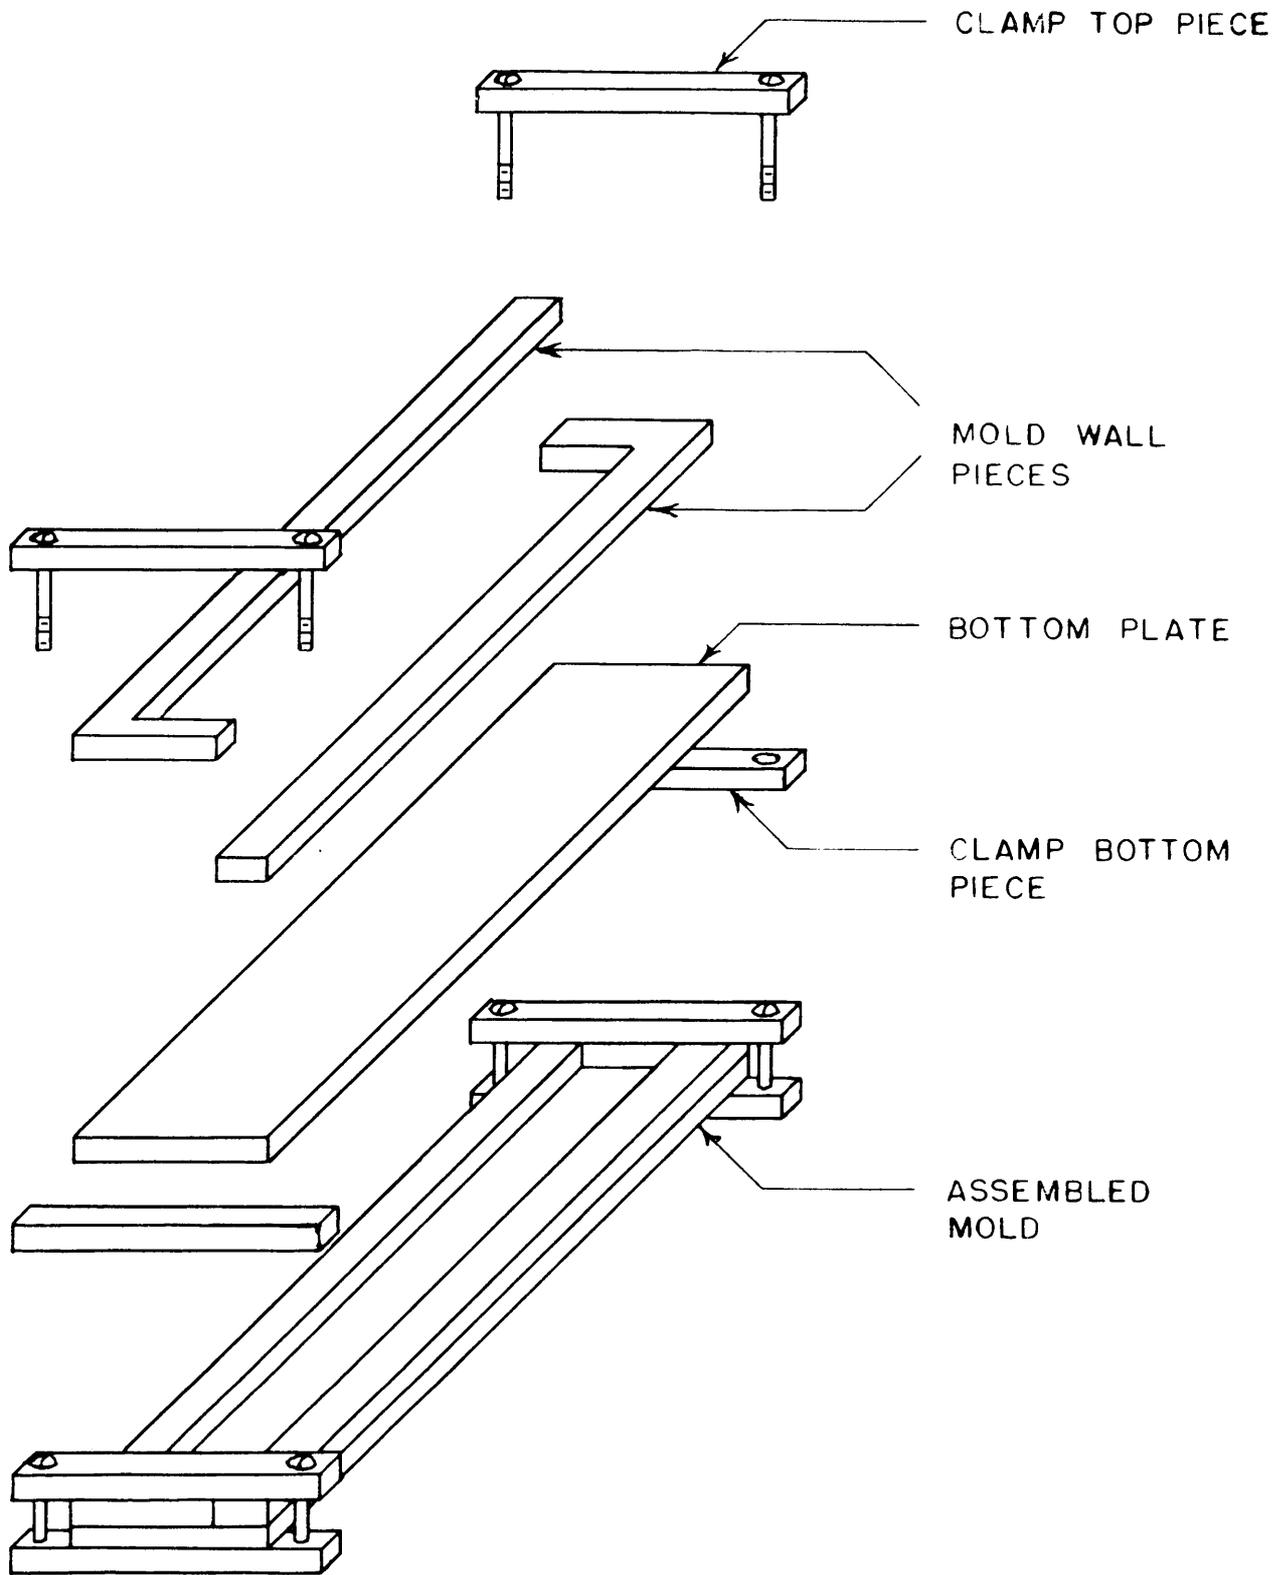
FIGURE I. FLEXURAL TEST BAR MOLD ASSEMBLY
